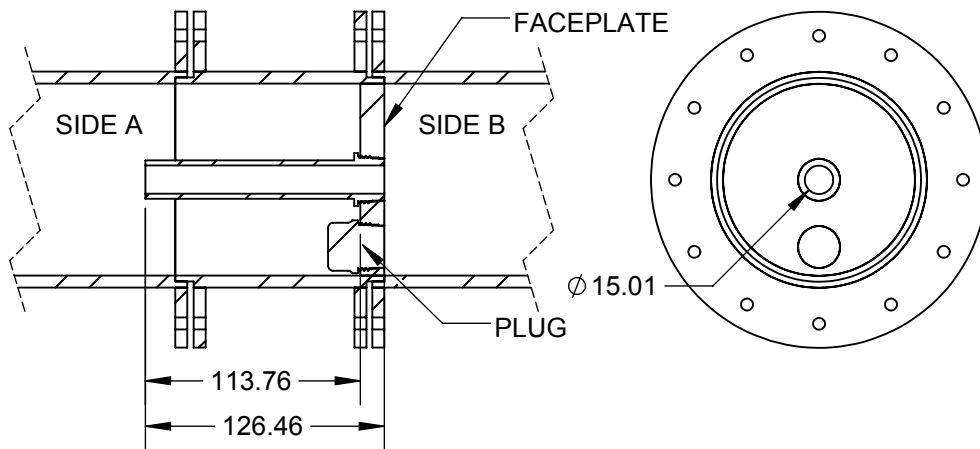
Front and sectional views of the mounting assembly for the single straight half-wave resonator installed in the two-sided impedance tube, with dimensions (in mm).
